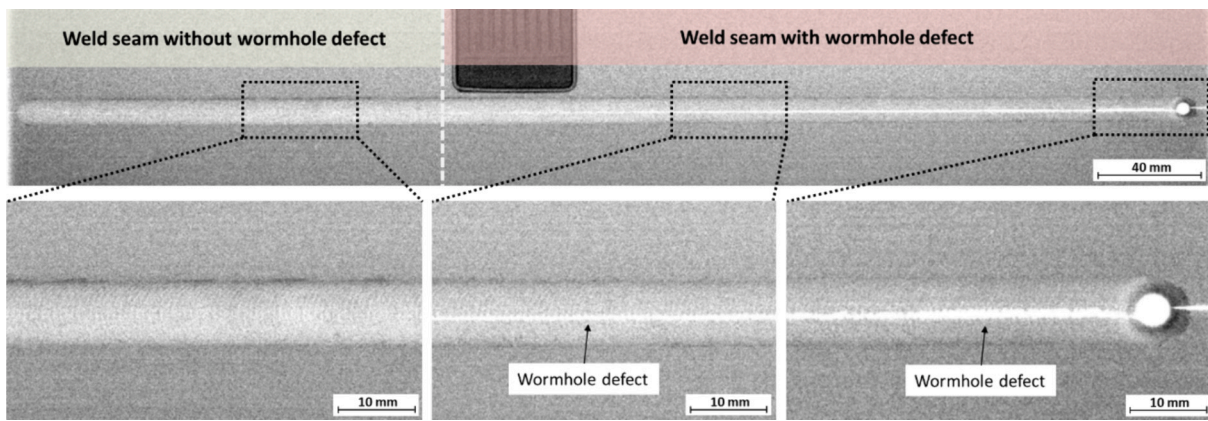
Frontal X-ray inspection of the welded joint w1 showing a section of the weld seam with and without the wormhole defect.
